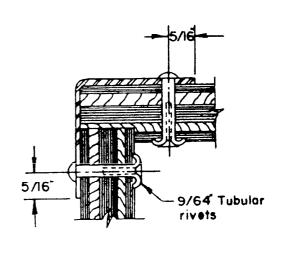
BOTTOM BINDING ANGLE SHEET STEEL
